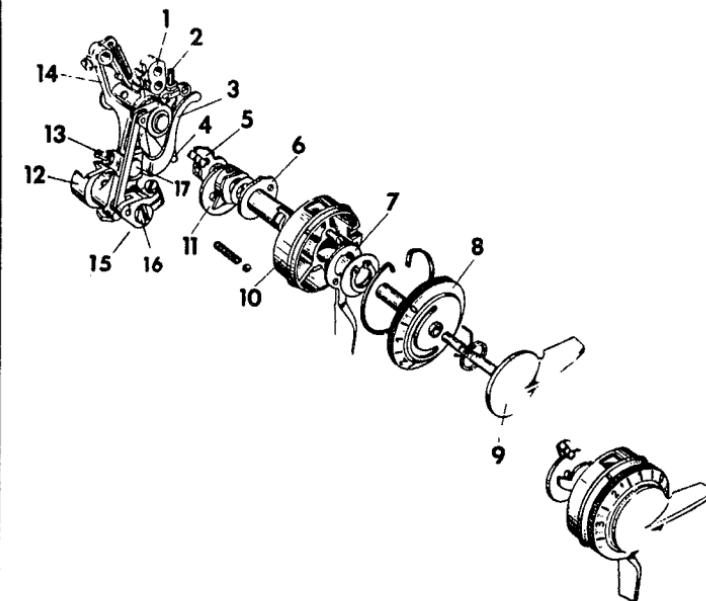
An exploded view of the zig-zag control mechanism of models 260, 262, 360 and 362. 1. Cam finger; 2. Regulating screw; 3. Needle position cam finger; 4. Connecting crank for zigzag and straight stitching; 5. Cam finger; 6. Needle position cam; 7. Needle position lever; 8. Stitch width dial; 9. Zigzag finger-tip control; 10. Zigzag regulator barrel; 11. Zigzag cam; 12. Zigzag regulator; 13. Regulating screw; 14. Zigzag regulator arm; 15. Zigzag regulator crank with connecting rod; 16. Zigzag regulator stud; and 17. Hexagon screw.
